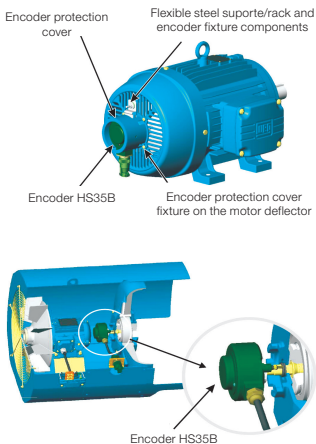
Encoder HS35B assembly for self-ventilated, or with forced ventilated motor
